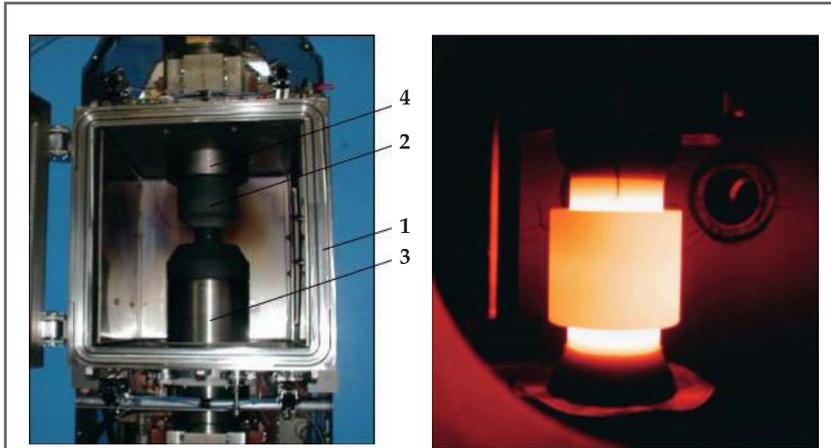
View of the vacuum chamber of the Spark Plasma Sintering (SPS) device [4] 1 - vacuum chamber body, 2 - press-mold made of graphite, 3 - lower punch, 4 - upper punch
